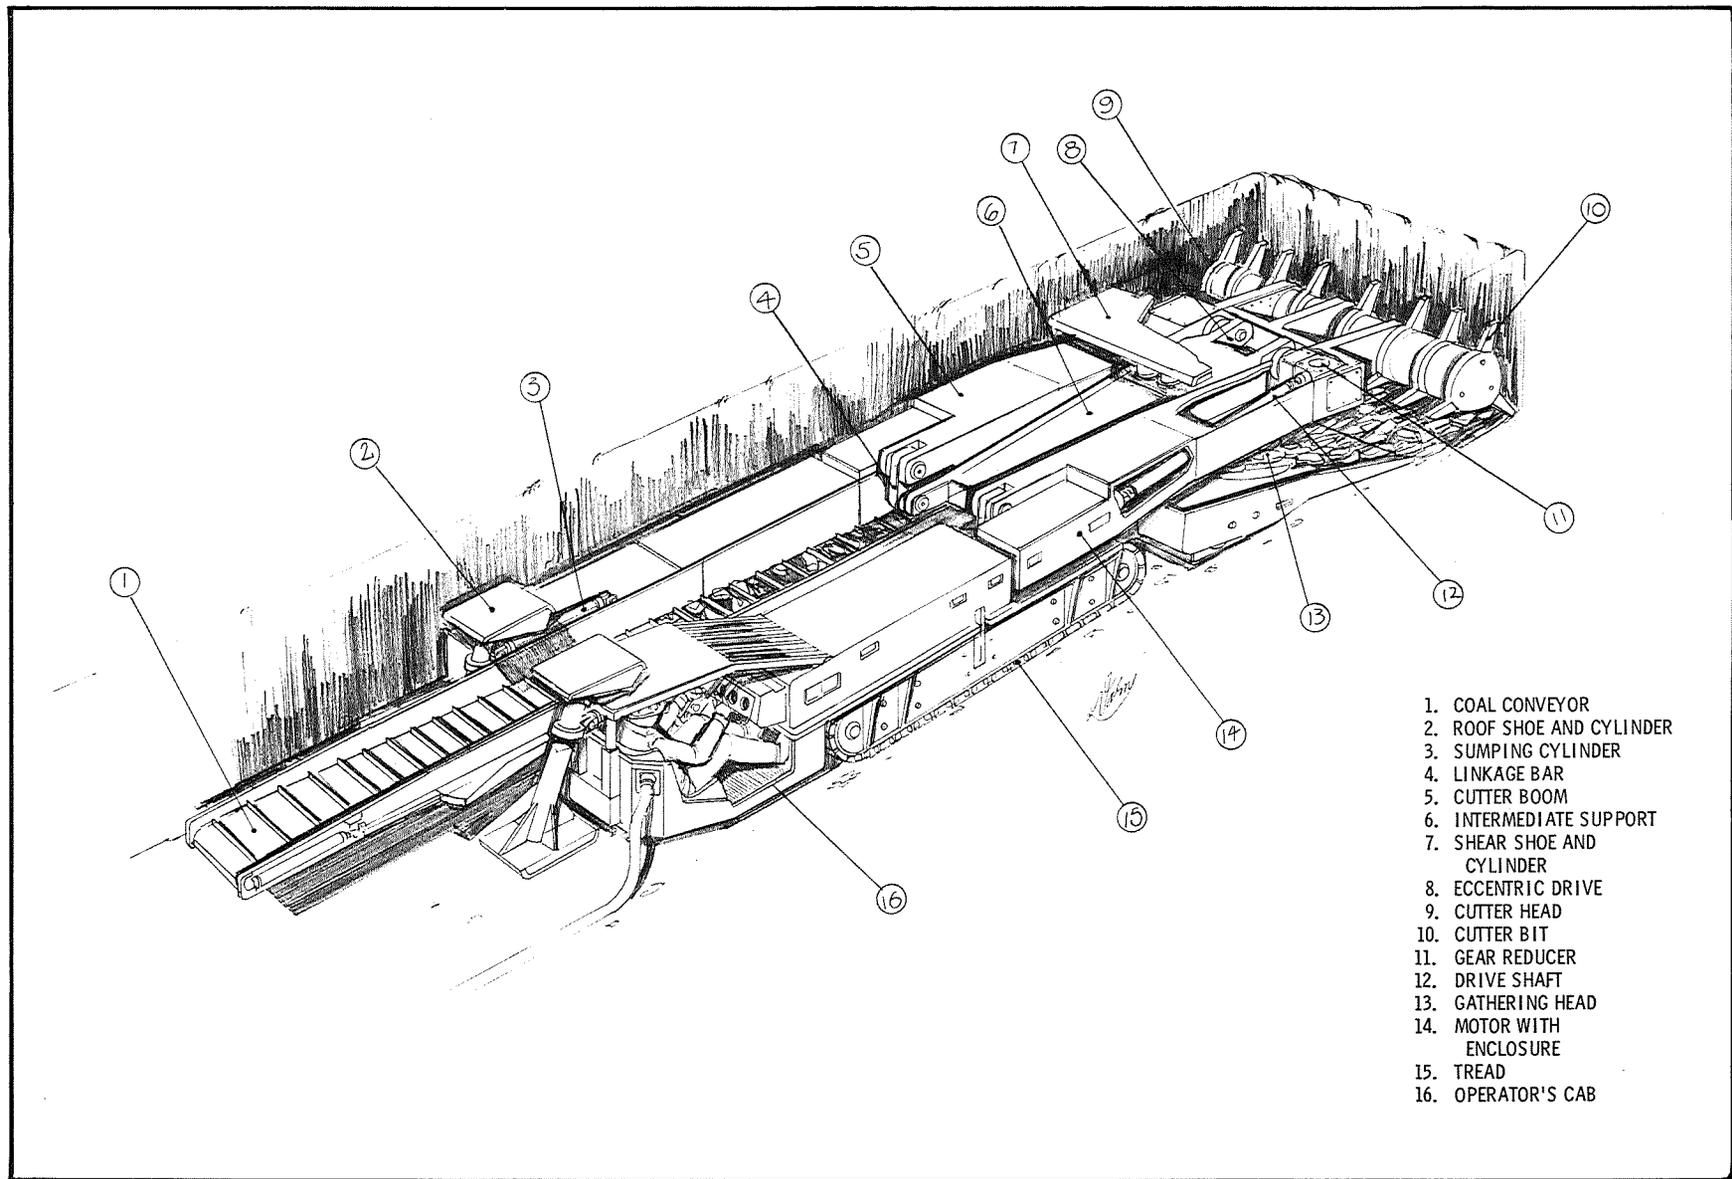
ARTIST'S DRAWING, LINEAR CUTTING ROTARY HEAD CONCEPT
